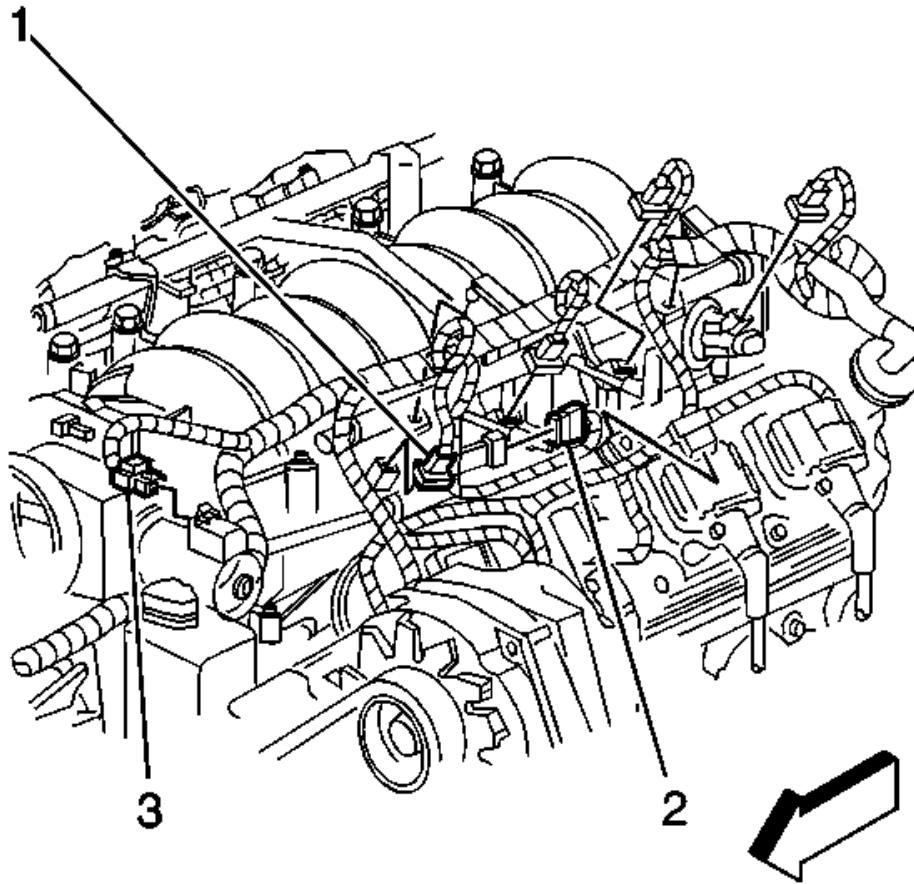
Locating EVAP Canister Purge Solenoid Valve Electrical Connector
